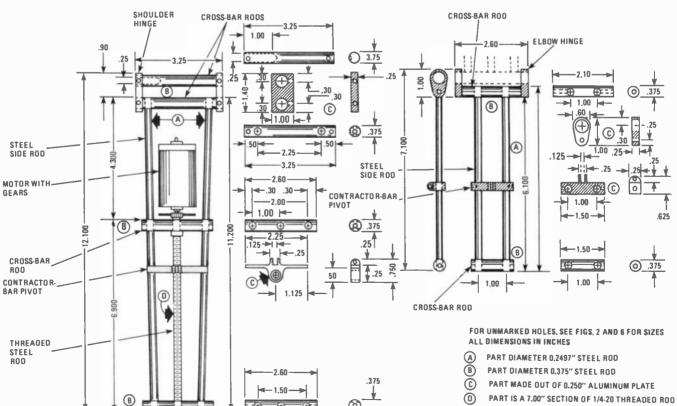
FABRICATION AND ASSEMBLY details of the manipulator. It would be a good idea to make a copy of this and keep it near your workbench for reference.
